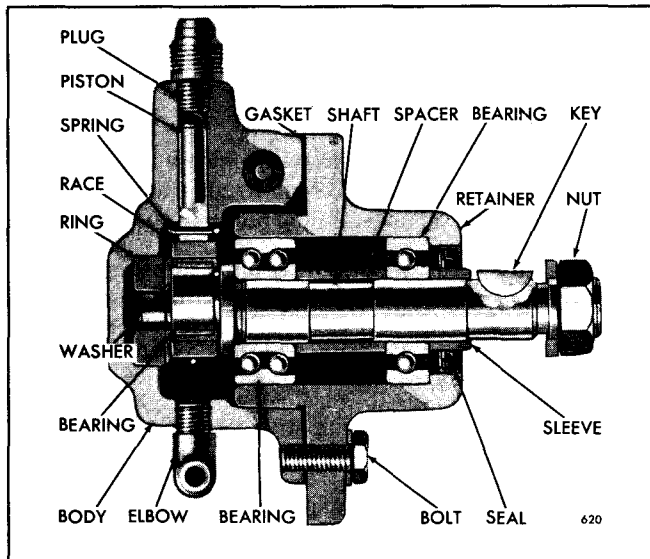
Belt-Driven Hydrostarter Charging Pump
